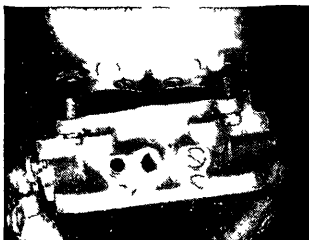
Remove body flange and gasket. Be sure to remove two small rubber idle passage gaskets
